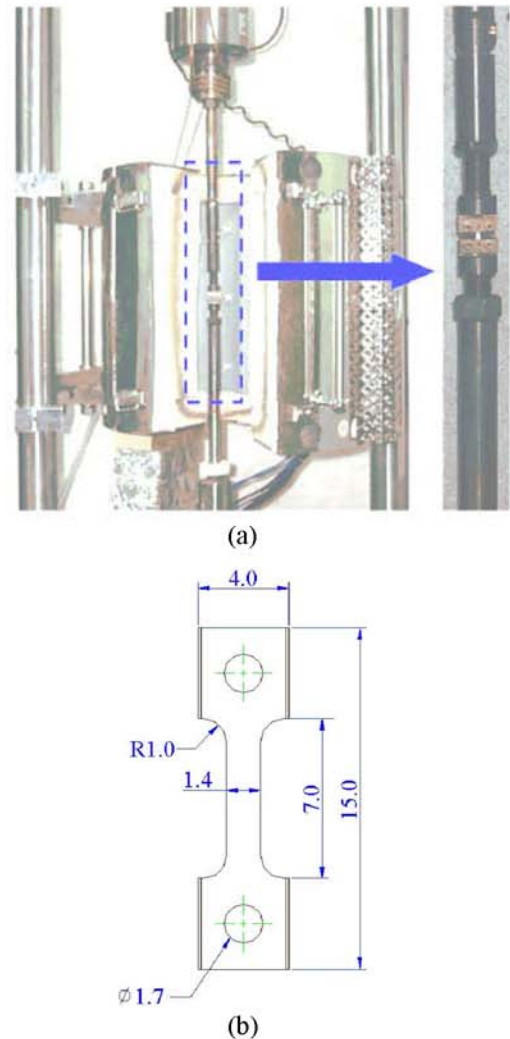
(a) View of testing apparatus equipped with electronic furnace for tensile testing of BAM specimen, (b) Dimensions of specimen used for tensile test.
